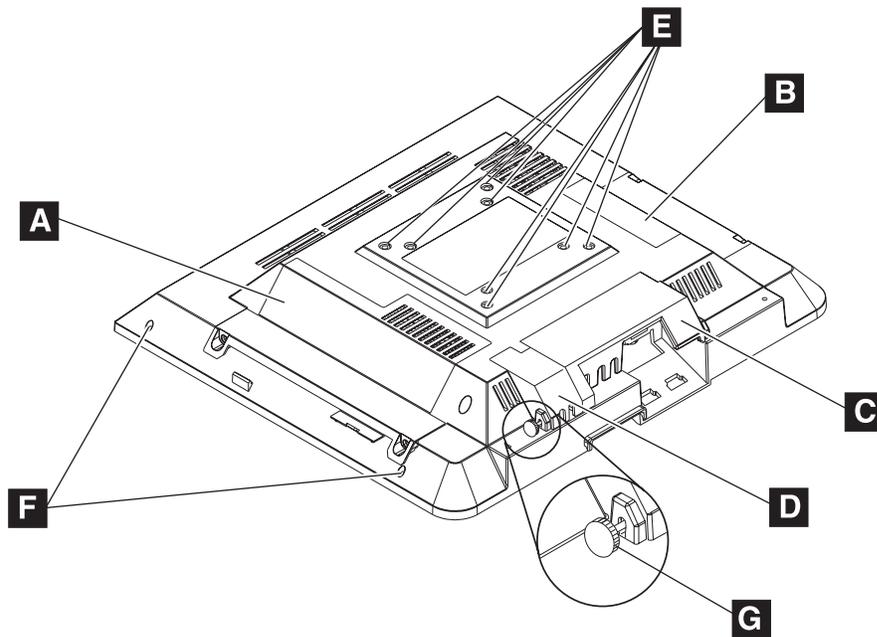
Rear view showing access doors, mounting holes, attachment holes
